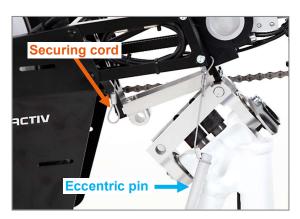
Insertion maul of the drive unit hung into the insertion shaft on the chassis, eccentric pin not inserted yet
